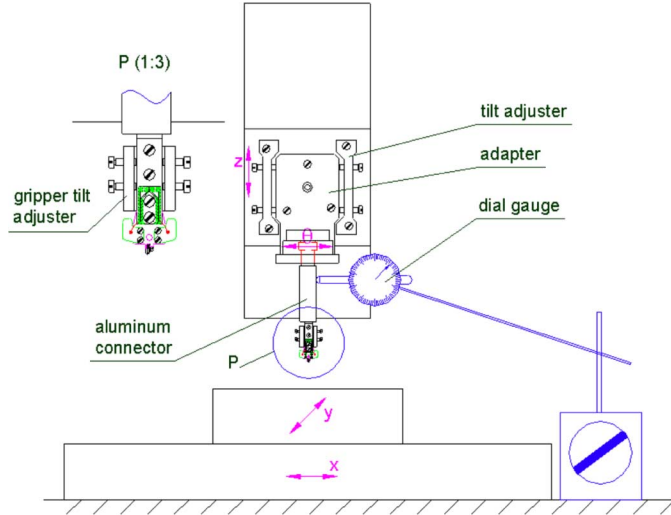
Robot calibration. Contact surfaces of aluminum connector and adapter are machined with high precision for calibration using a dial gauge.
